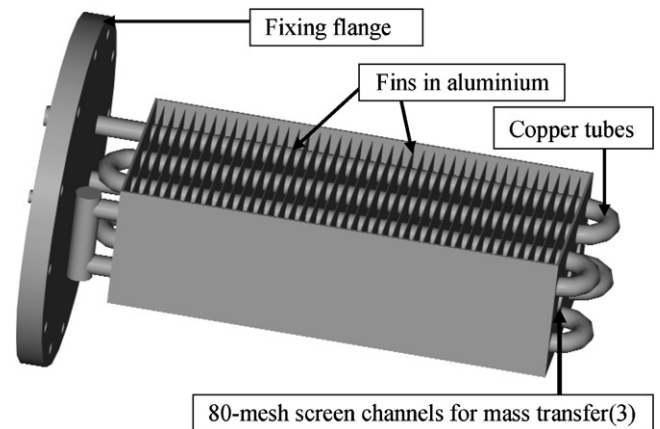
Perspective drawing of the adsorber heat exchanger.
